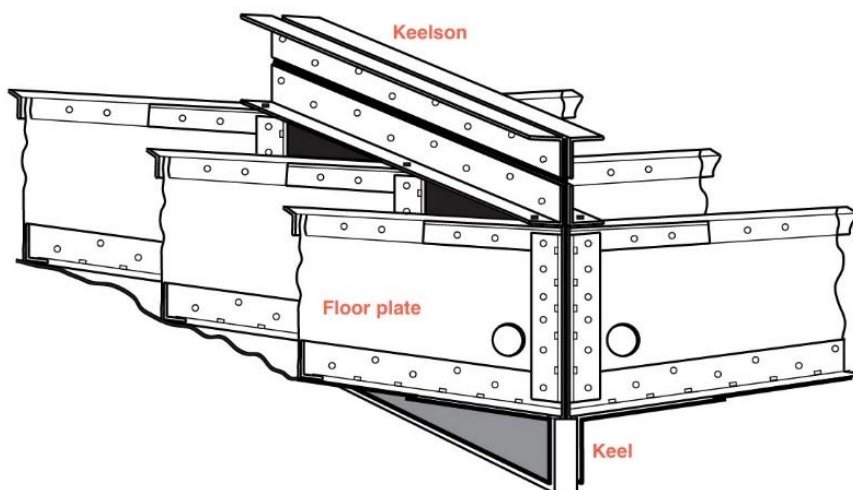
Oblique view of possible keelson/keel and floor plate construction of the S.S. *Dicky*, showing the T-shaped centre through plate type keelson and jointed floor plates.³⁸
